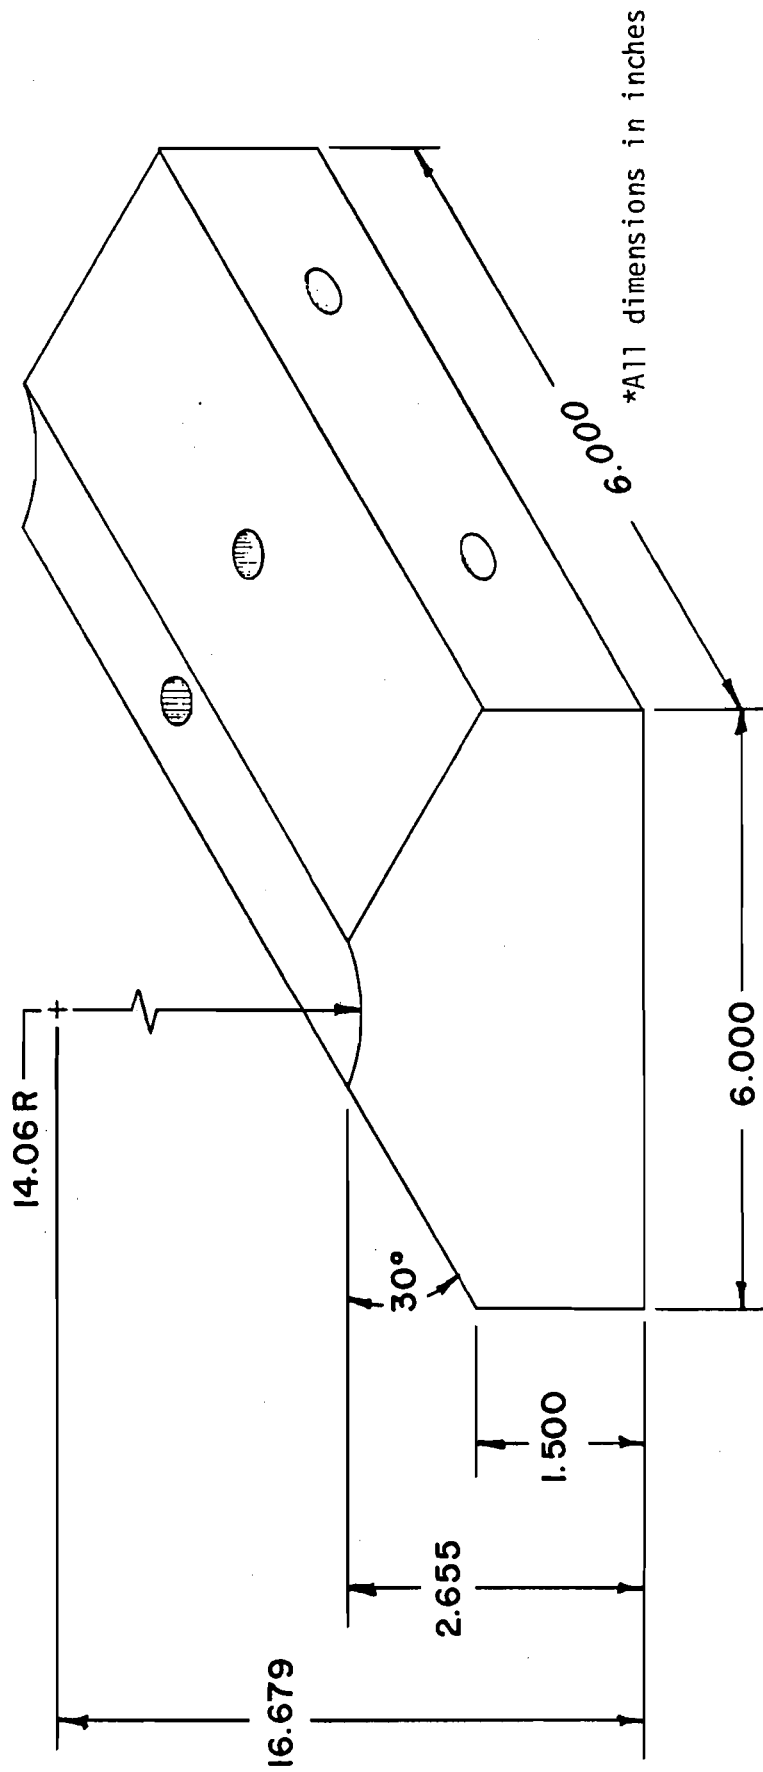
(b) Pole piece #2 EMAT mounts on the top surface.
